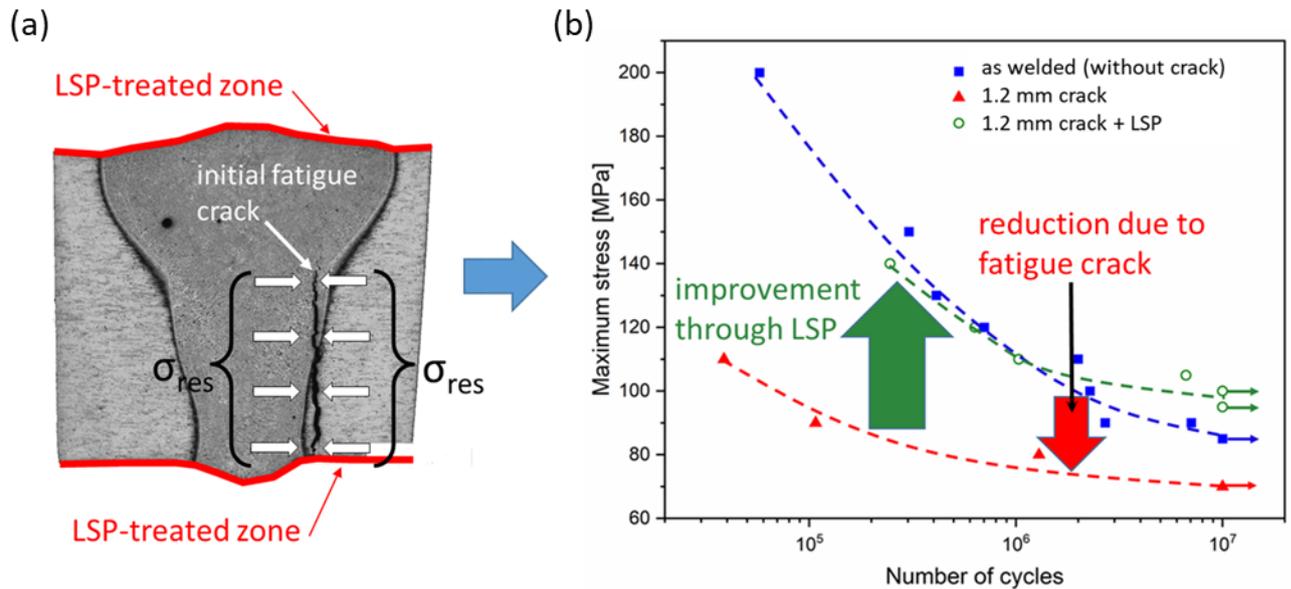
(a) Schematic of the specimen with an initial surface fatigue crack and (b) fatigue test results of laser beam welded specimens, laser beam welded specimens with the fatigue crack and laser beam welded specimens with the fatigue crack after LSP-treatment.
